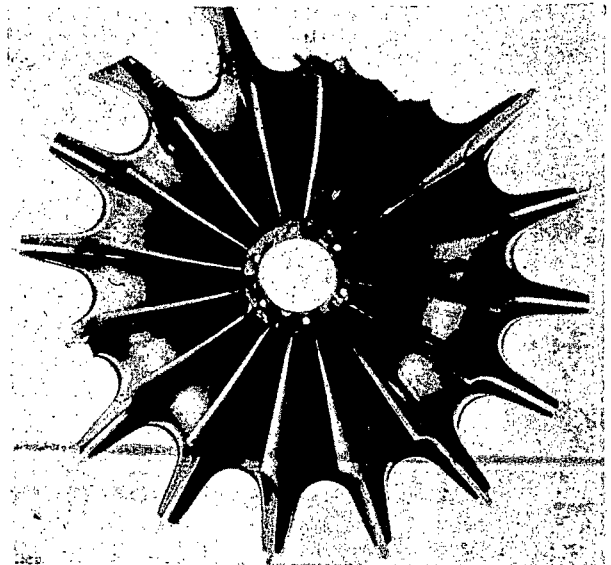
Impeller failures with impeller wall cut-outs.
